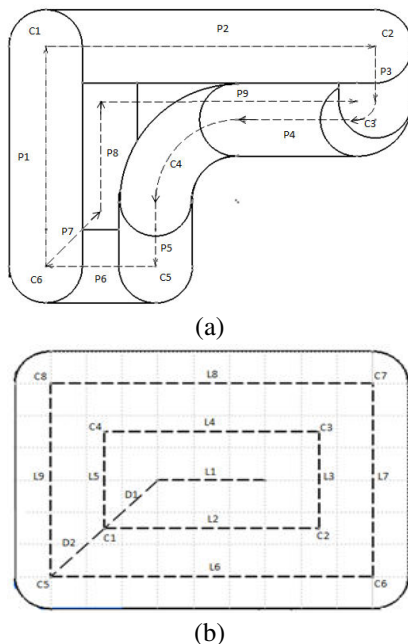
Shape of the pocket (a) SHAPE 1 (b) SHAPE 2.
